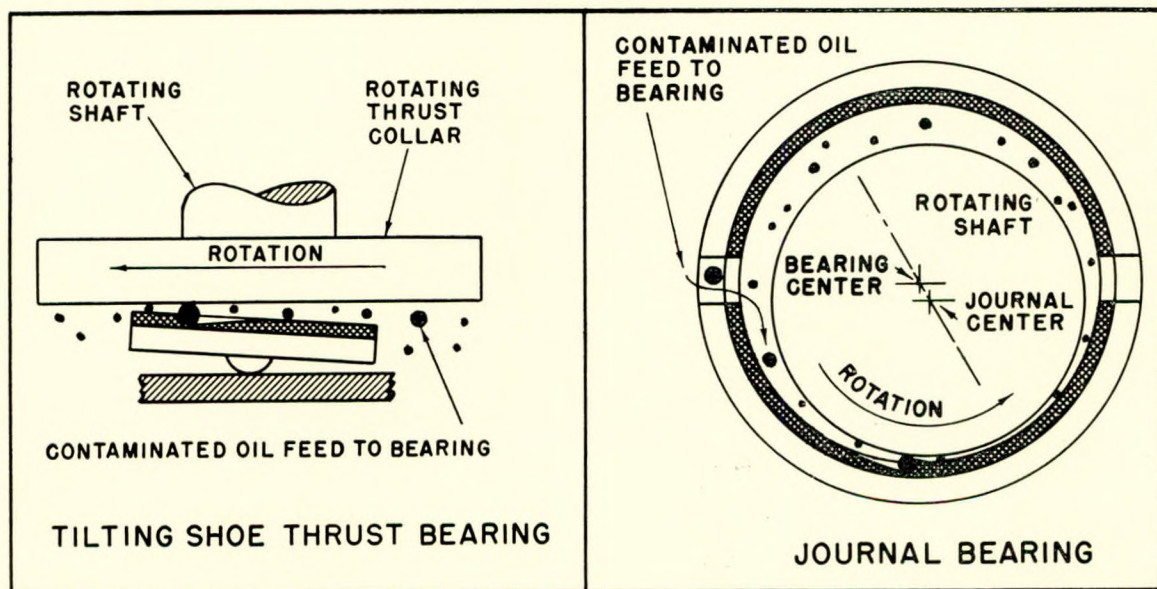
Contamination particles in the bearing oil. Note how the larger particles, which are thicker than the thin oil film, cut grooves in the bearings and become embedded
